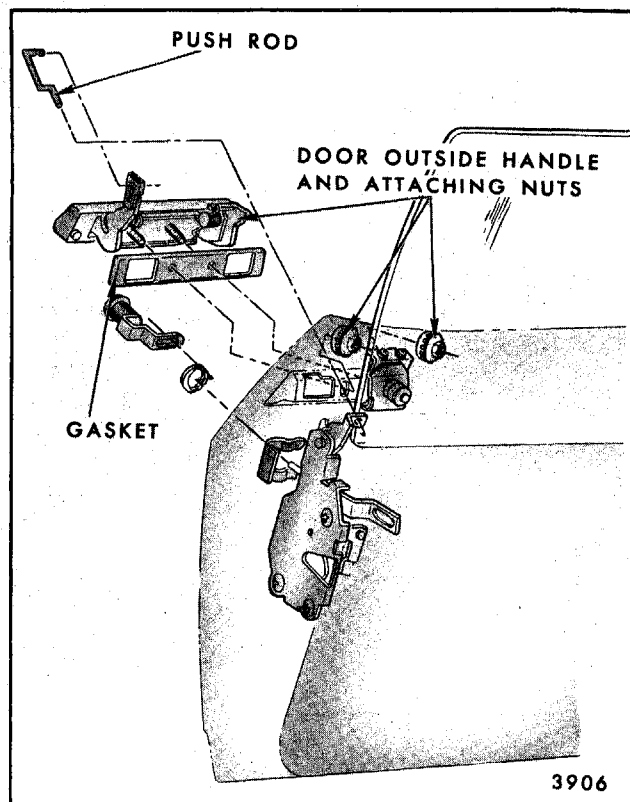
Outside Handle Removal (Lift Bar Type)
